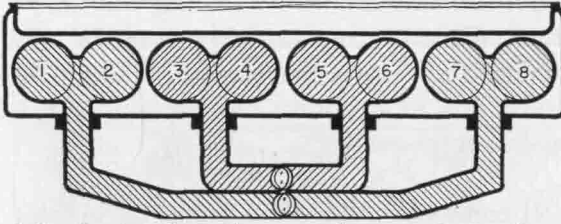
Fuel distribution through two air horns in dual carburetor and intake manifolds on an eight-cylinder in-line engine. (Buick Motor Division of General Motors Corporation)
